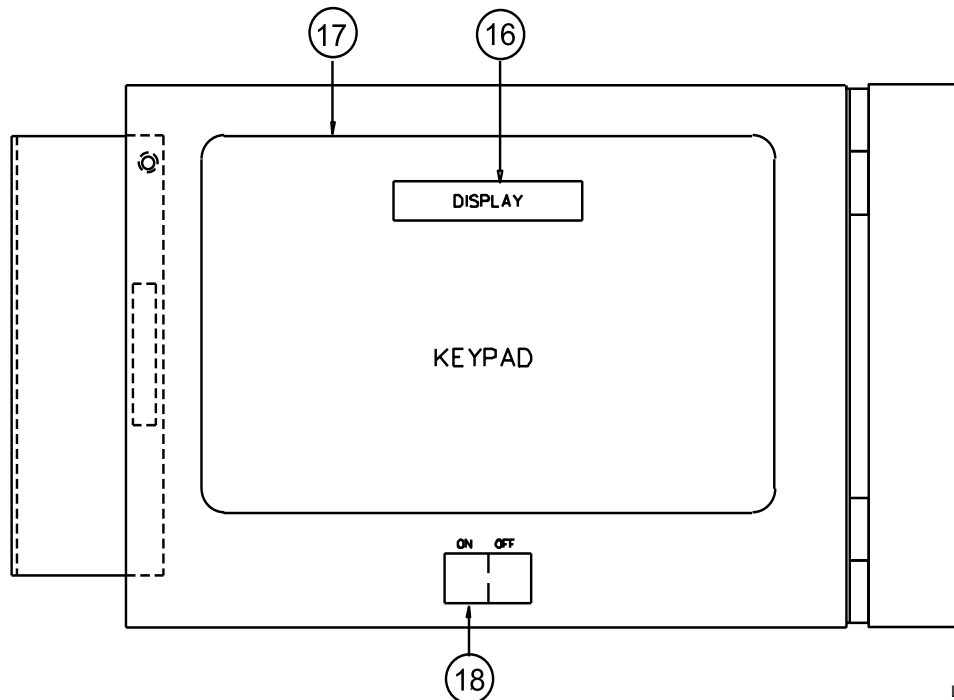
CONTROL PANEL COMPONENTS (REF. TABLE 7A, PAGES 27-46)
